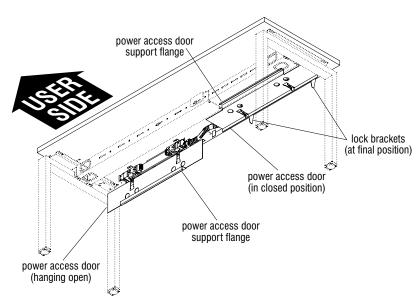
Single-Sided Fixed Benching Power Access Door Installation
